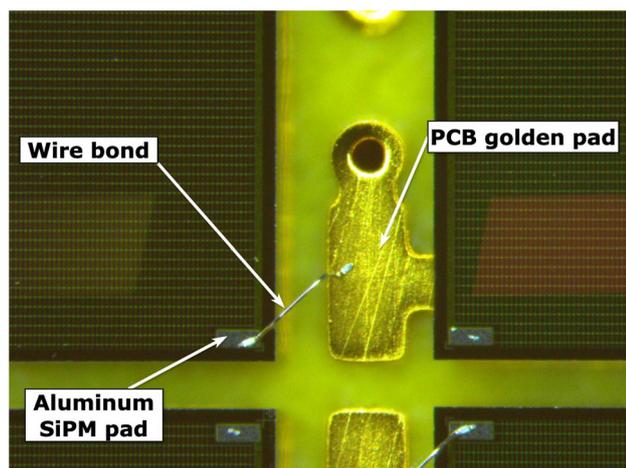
Wire bonding: a low-resistance electrical contact is built between the SiPM anode and the PCB. The contact is made using a $25\ \mu\text{m}$ thick aluminium conductive wire, through a wedge bonding
